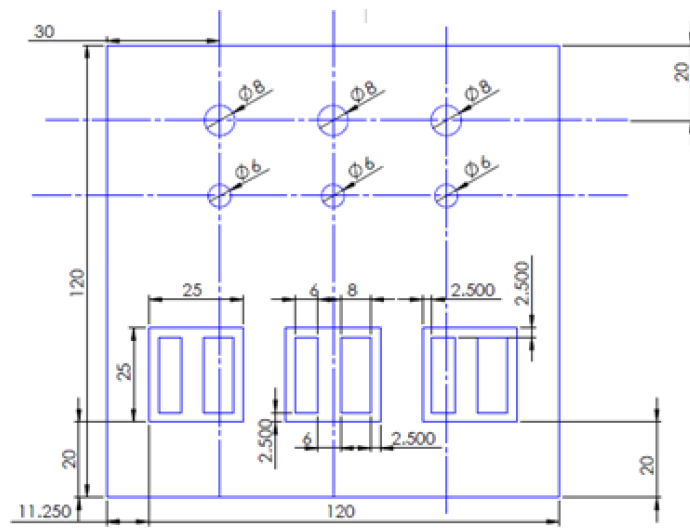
CAD drawing of the defects introduced at the lay-up stage (all dimensions in mm)
